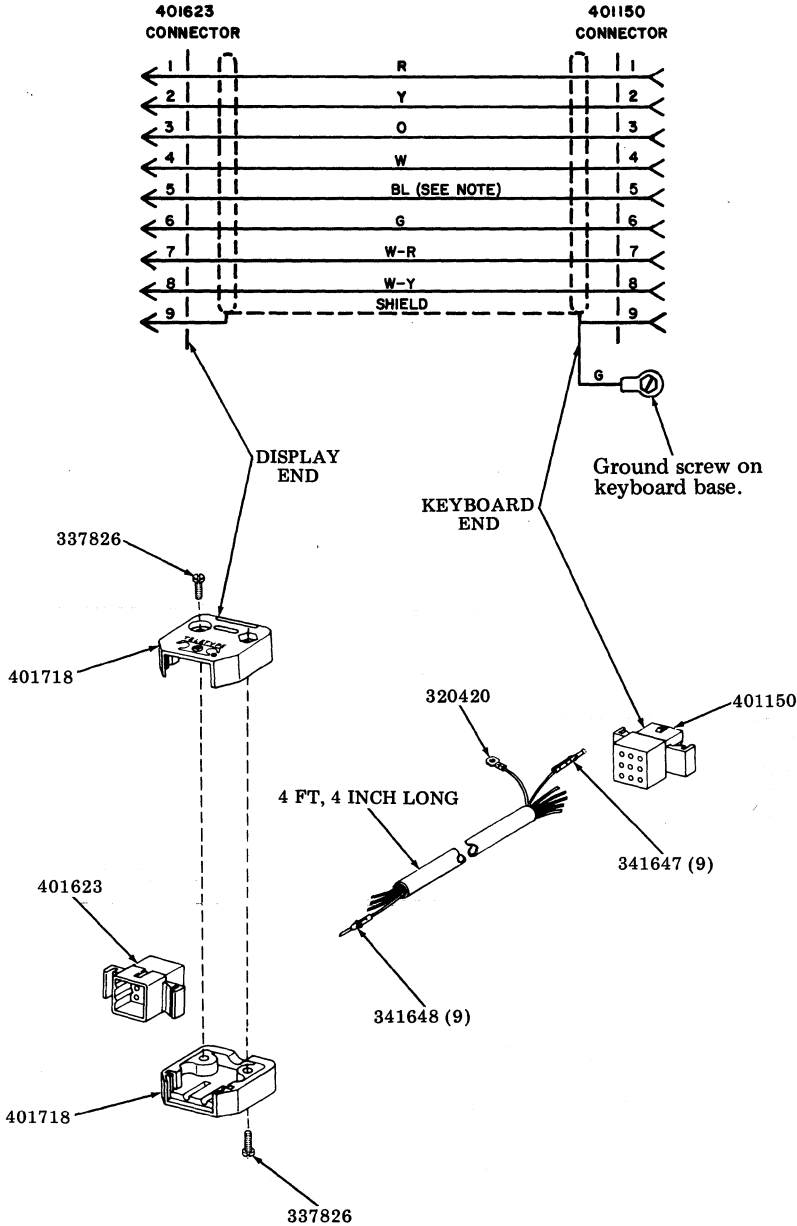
341895 Printer Extension Cable Assembly (KDP Terminal)
